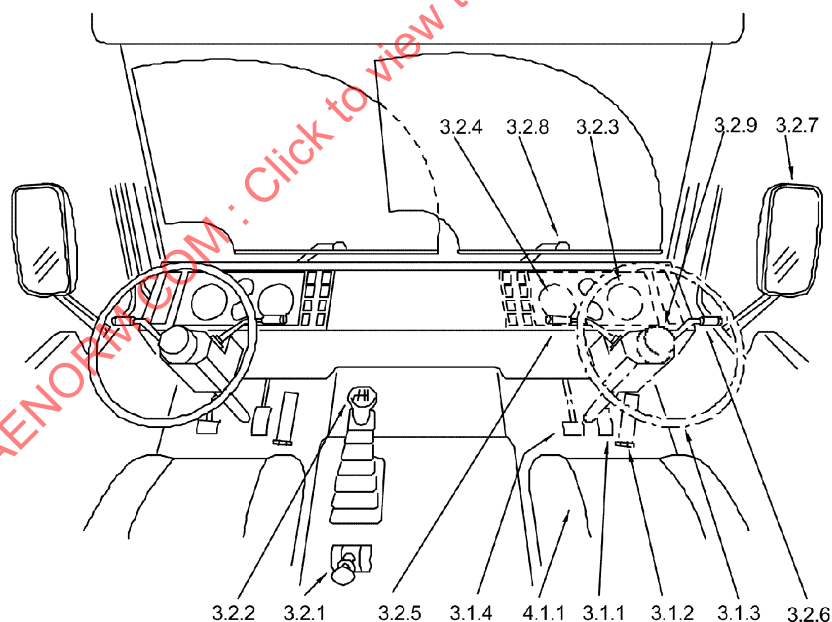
TYPICAL LAYOUT OF SYSTEM
